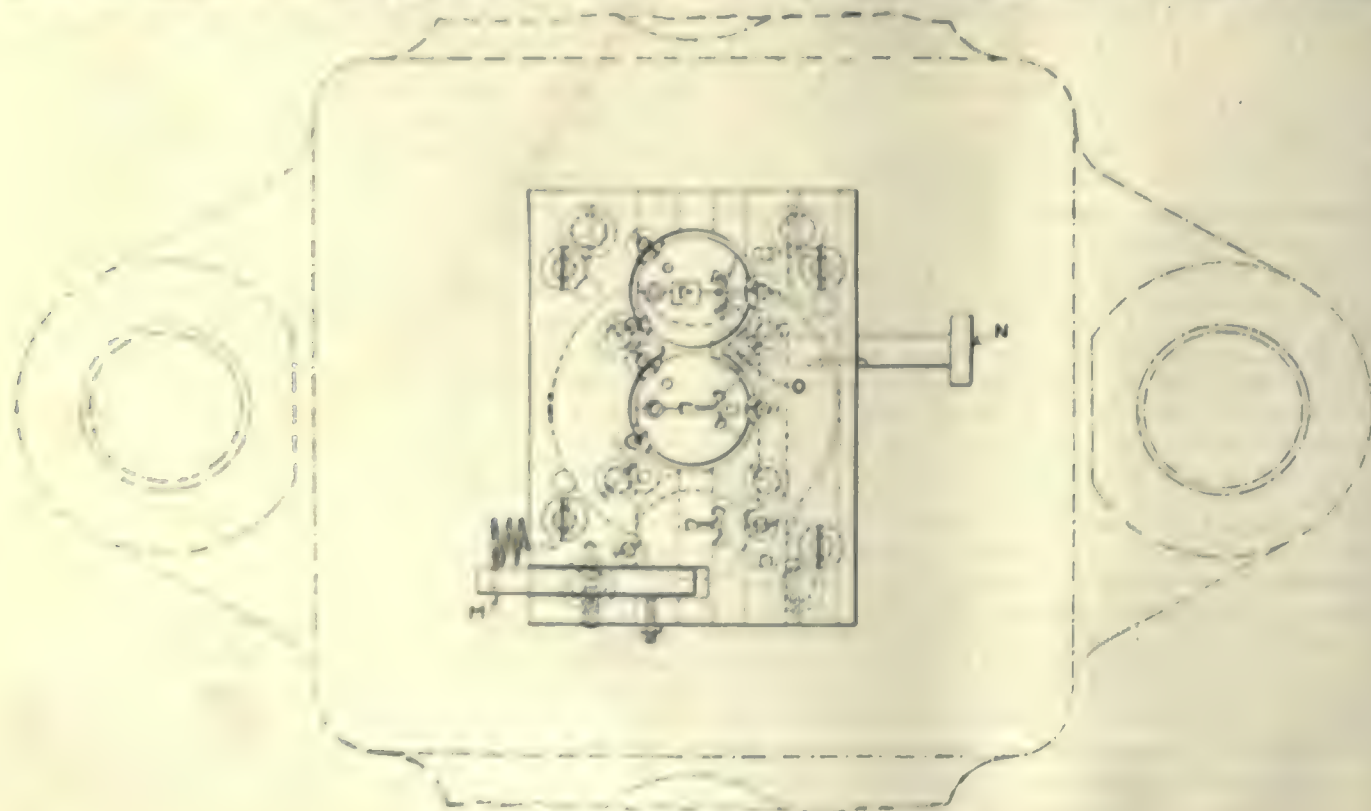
PLAN VIEW OF THE BLANKING DIES
